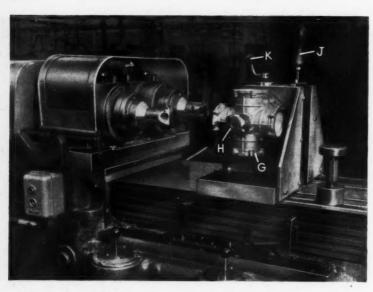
The set-up for fine-boring the cylinders of meter bodies on a 2-spindle Precimax machine, equipped with a double-sided indexing fixture
